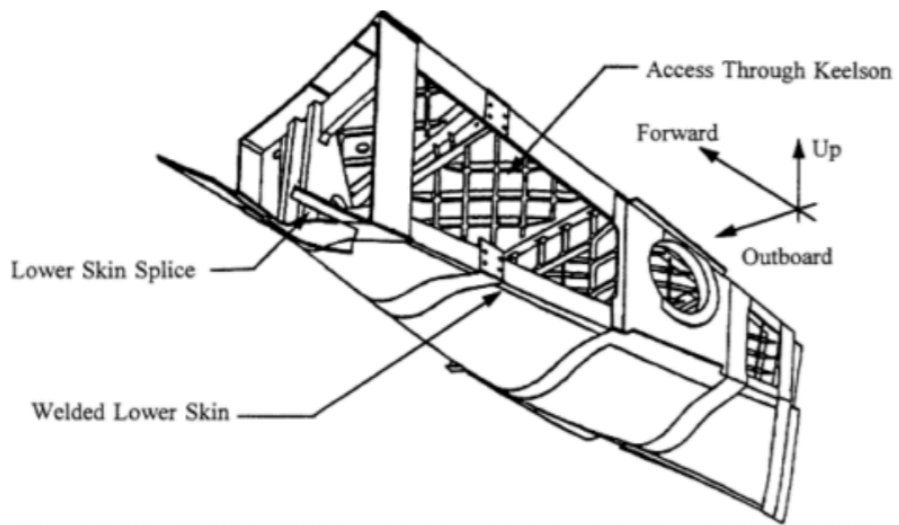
Welded aft boom (3, p. 50; 65, p. 54)
